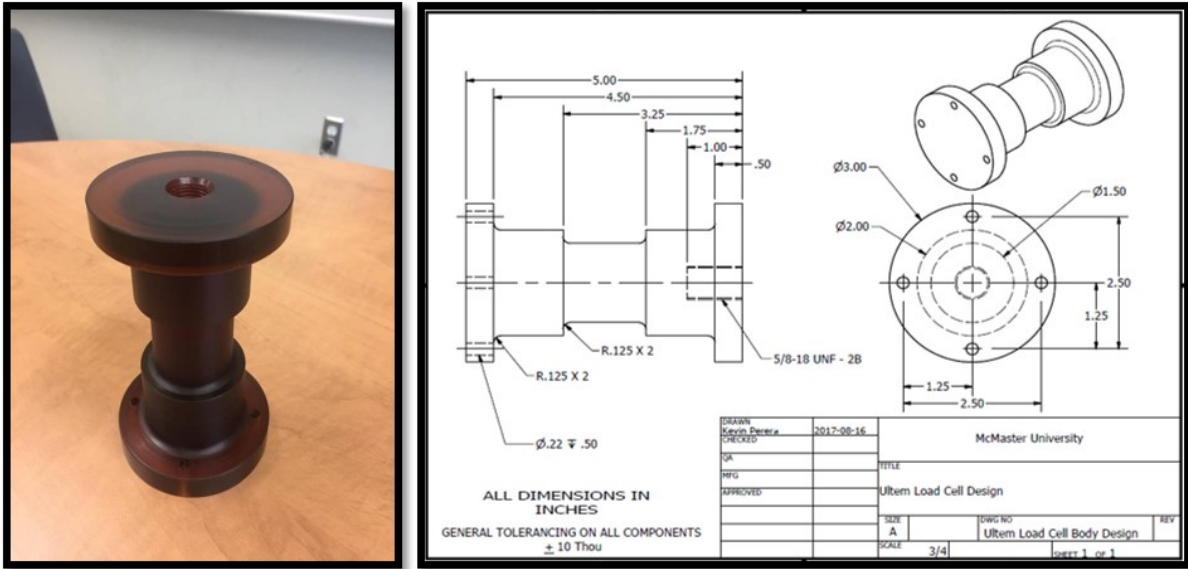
Load cell body (left) and engineering drawing (right). Thank you to Kevin Perera for generating the drawing and milling the load cell from Ultem plastic.
